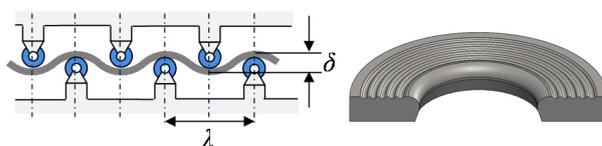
Bending mechanisms by deep drawing with macro-structured tools.
